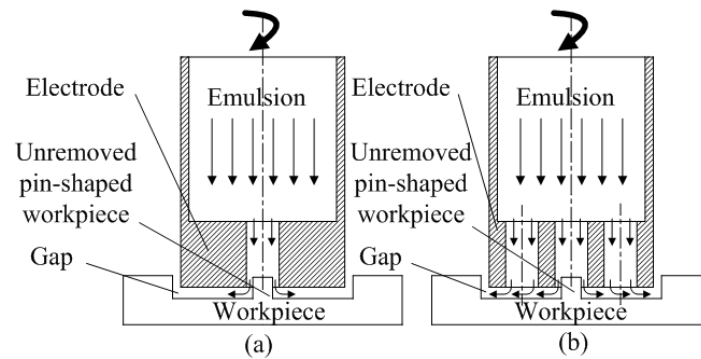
Schematic of (a) conventional tube cylindrical electrode; (b) multihole cylindrical electrode.
